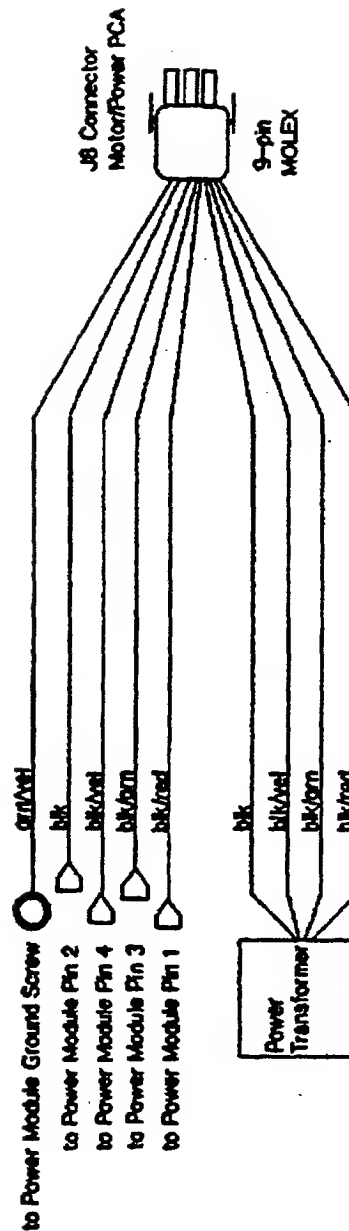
Power Cable to 07980-6xx05 and 88780-6xx05 PCA
